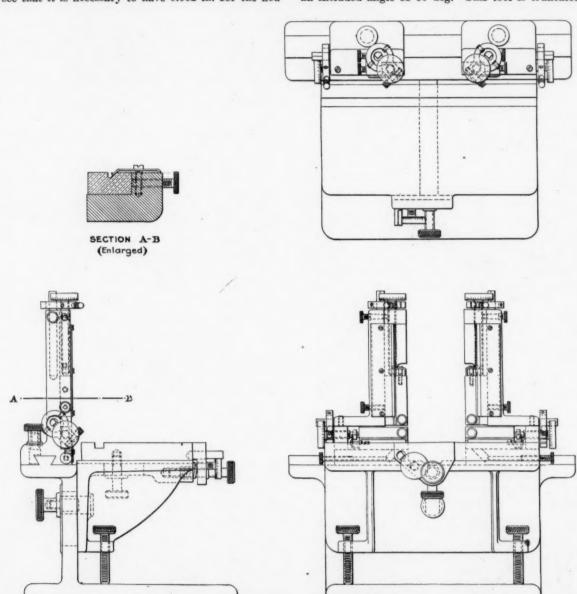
Projection Machine for Inspecting Screw Threads
